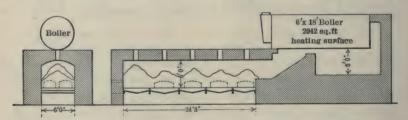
THE EARLY HOYT FURNACE FOR BURNING TAN BARK.
